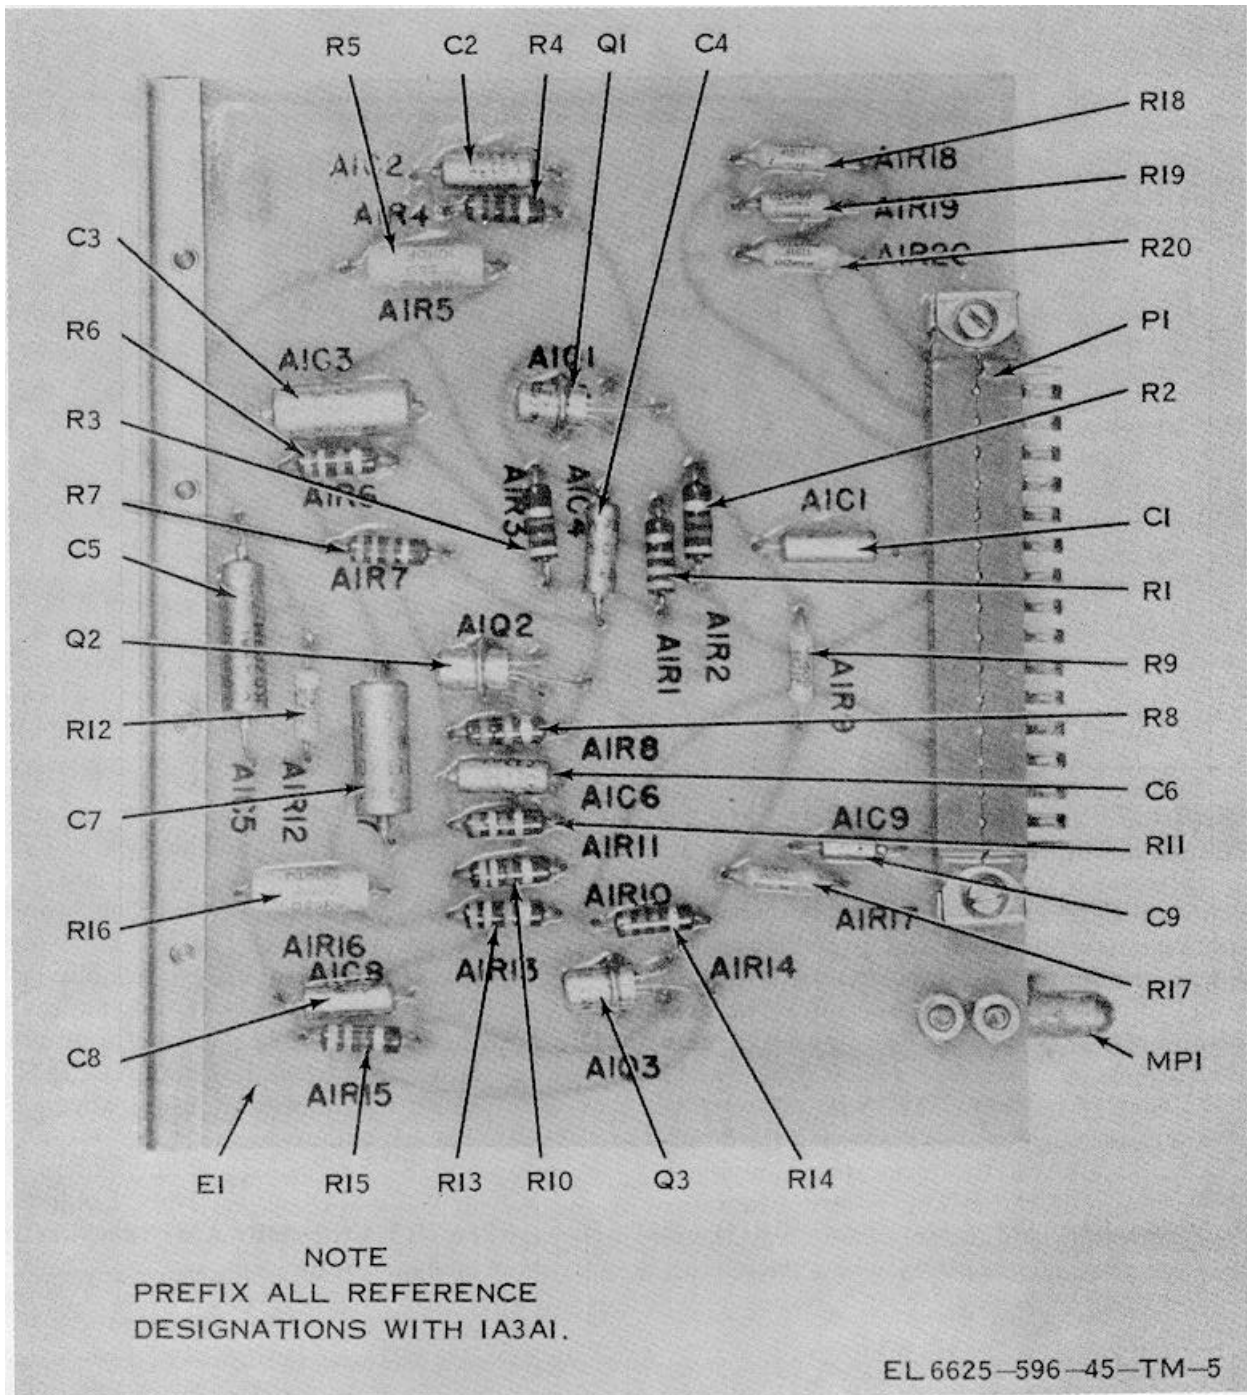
Preamplifier assembly 1A3A1, parts location
